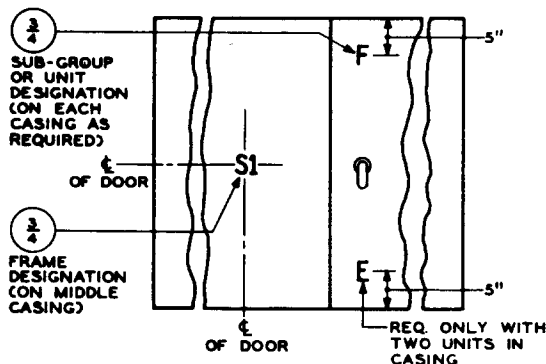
Designations on Panel System Casing-enclosed Equipment
